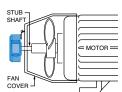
Shaft mounted on totally enclosed fan cooled motor.
